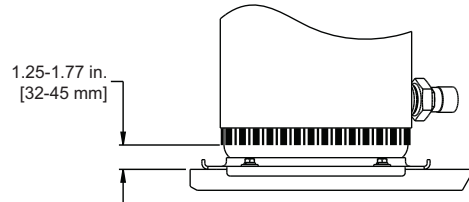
Copeland ZP235 Crankcase Heater Location
